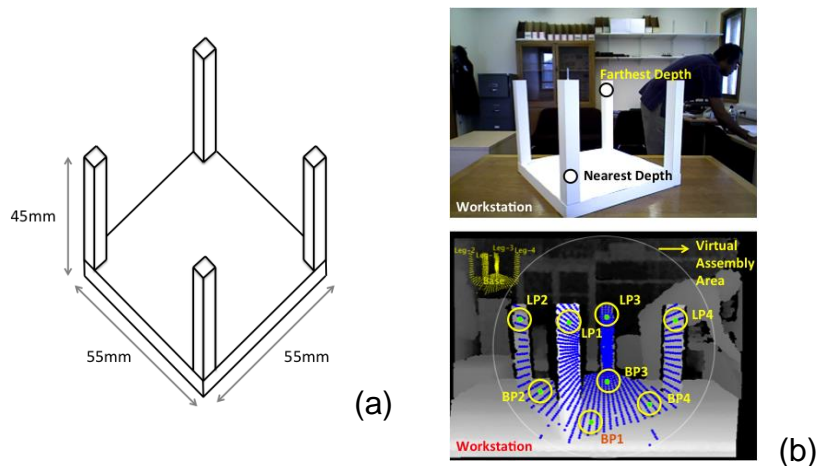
(a) Known geometry of the assembled workpiece (b) Workpiece feature recognition points
